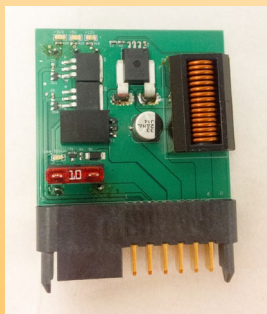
Picture of ROV Cerulean Power Conversion Board
